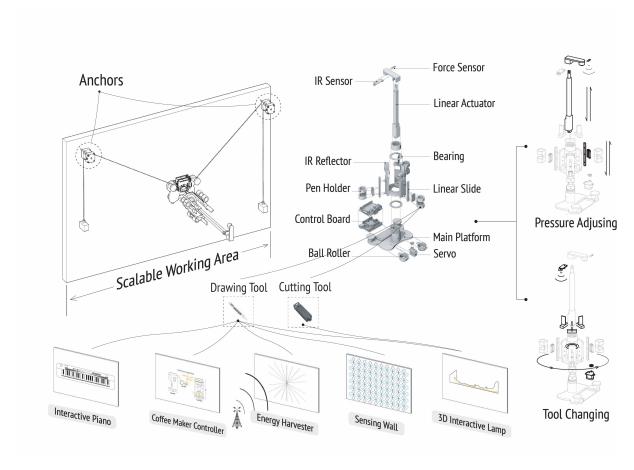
Demonstration of the hardware design: Top-left: Overview of the system. Middle: The explosion view of the drawing platform. Top-right: Two highlighted functions designed for circuit fabrication. Bottom: Highlighting drawing tools and cutting tool with associated applications.
